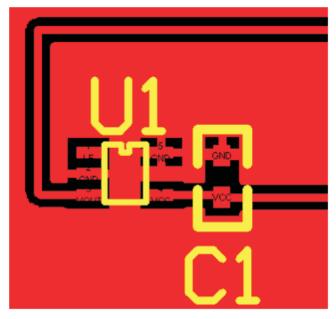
TMP20 Layout with Proper Electrical and Poor Thermal Connections to Ground
